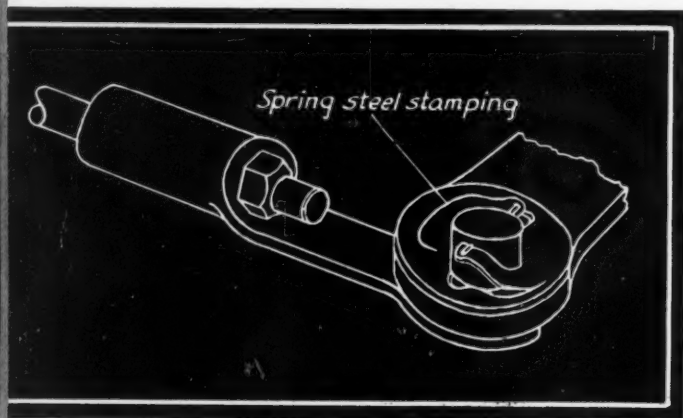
Patented spring clip, an inexpensive stamping, replaces threaded connection using two locknuts
